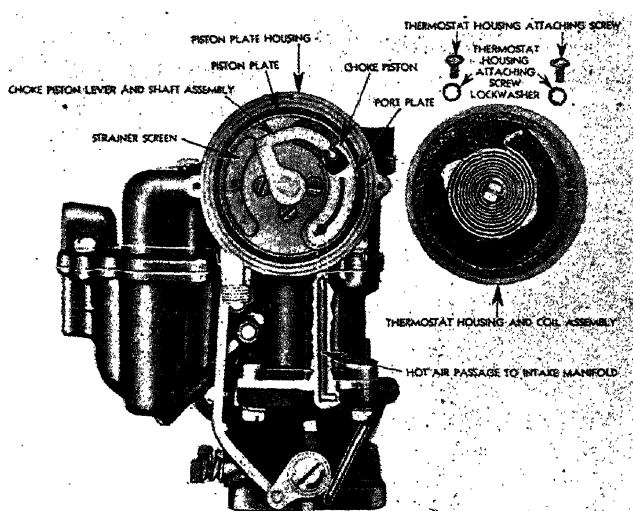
The Thermostatic Control used on certain Carter Carburettors.
